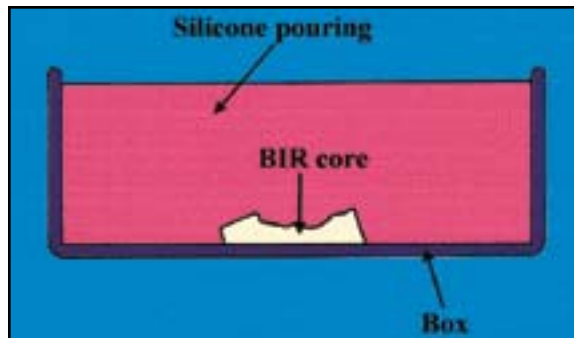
Box filled with silicone after affixing BIR core to bottom.
